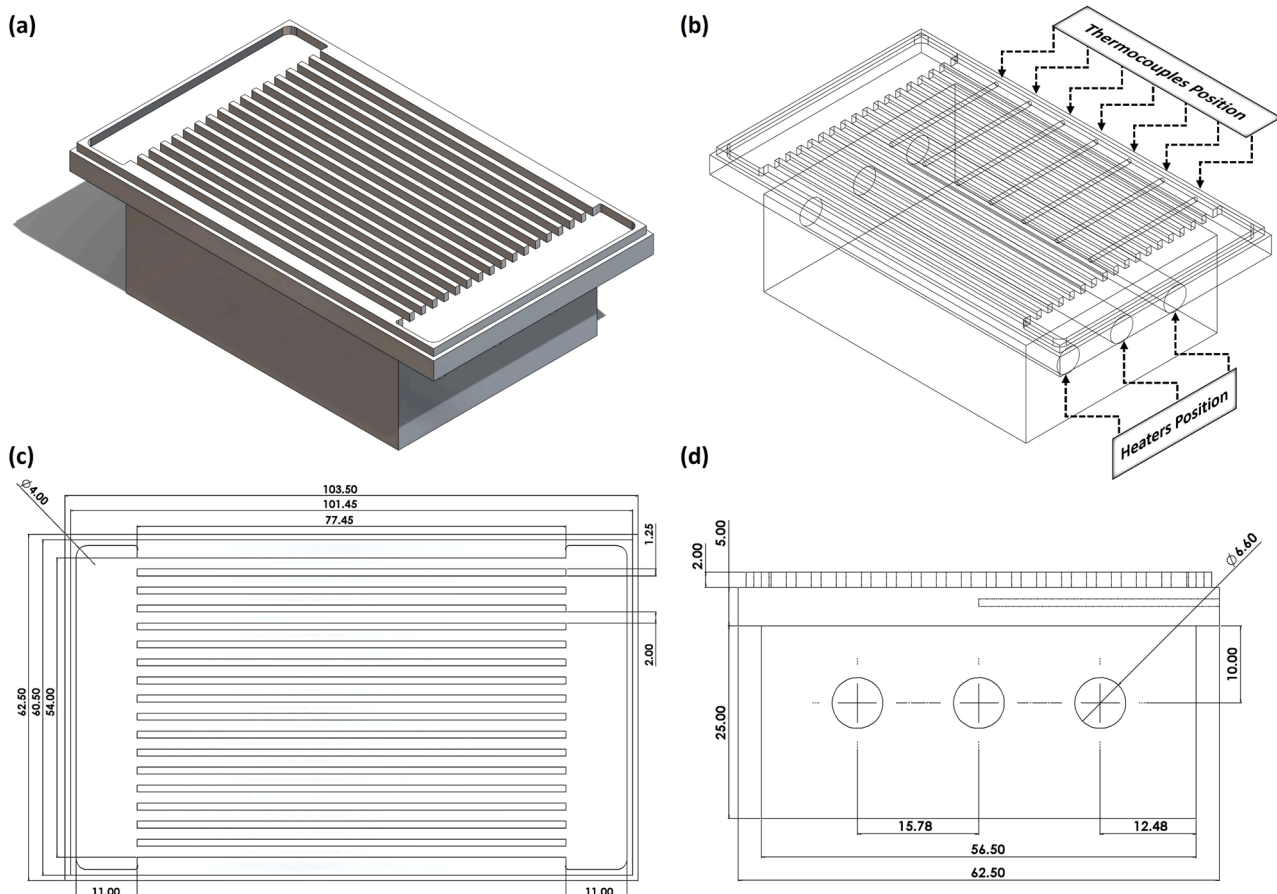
Geometrical configuration of the heat sink, illustrating the dimensional parameters and positions of heaters and thermocouples.
